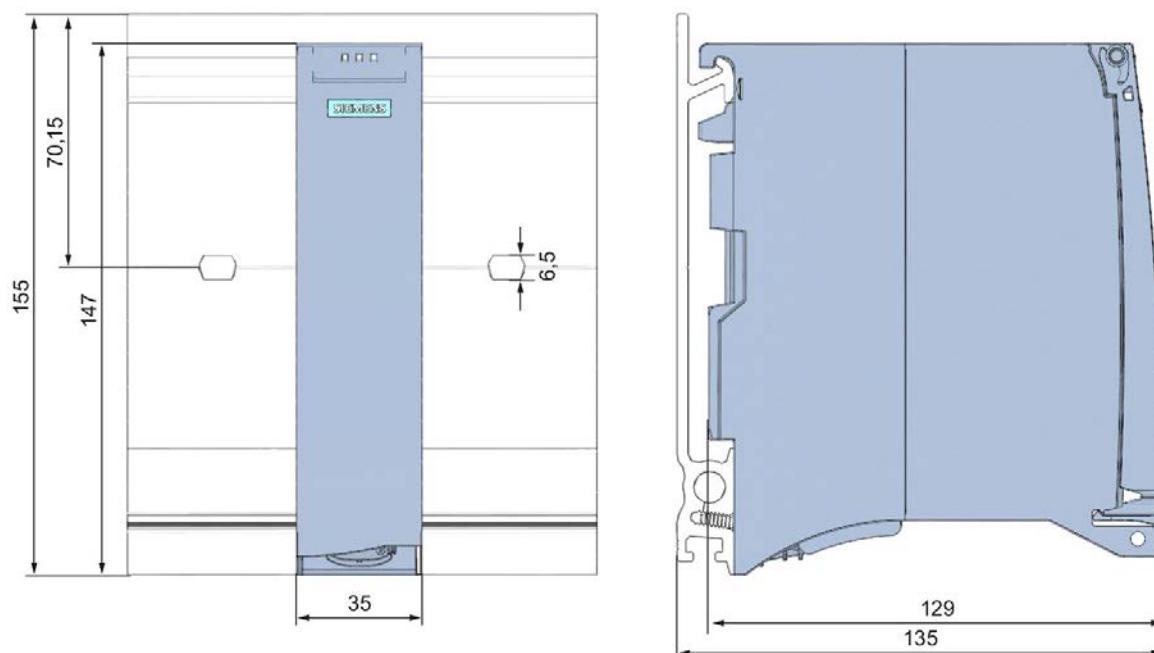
Dimension drawing of the IM 155-5 PN BA interface module, front and side views
